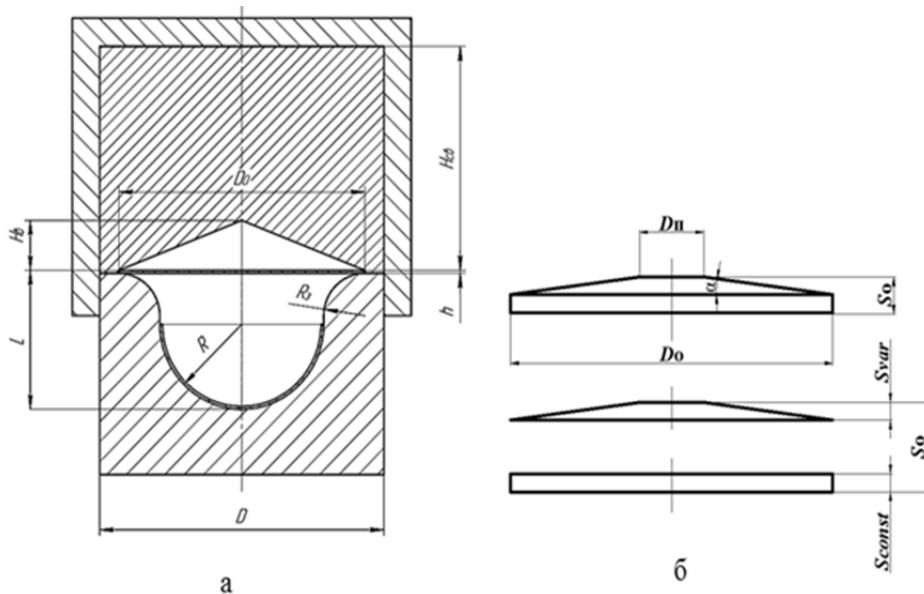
The scheme of stamping hemispherical parts: a — die tooling; b — workpiece
